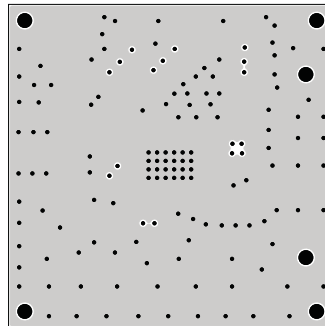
SKY65160-11 Evaluation Board Assembly Diagram
